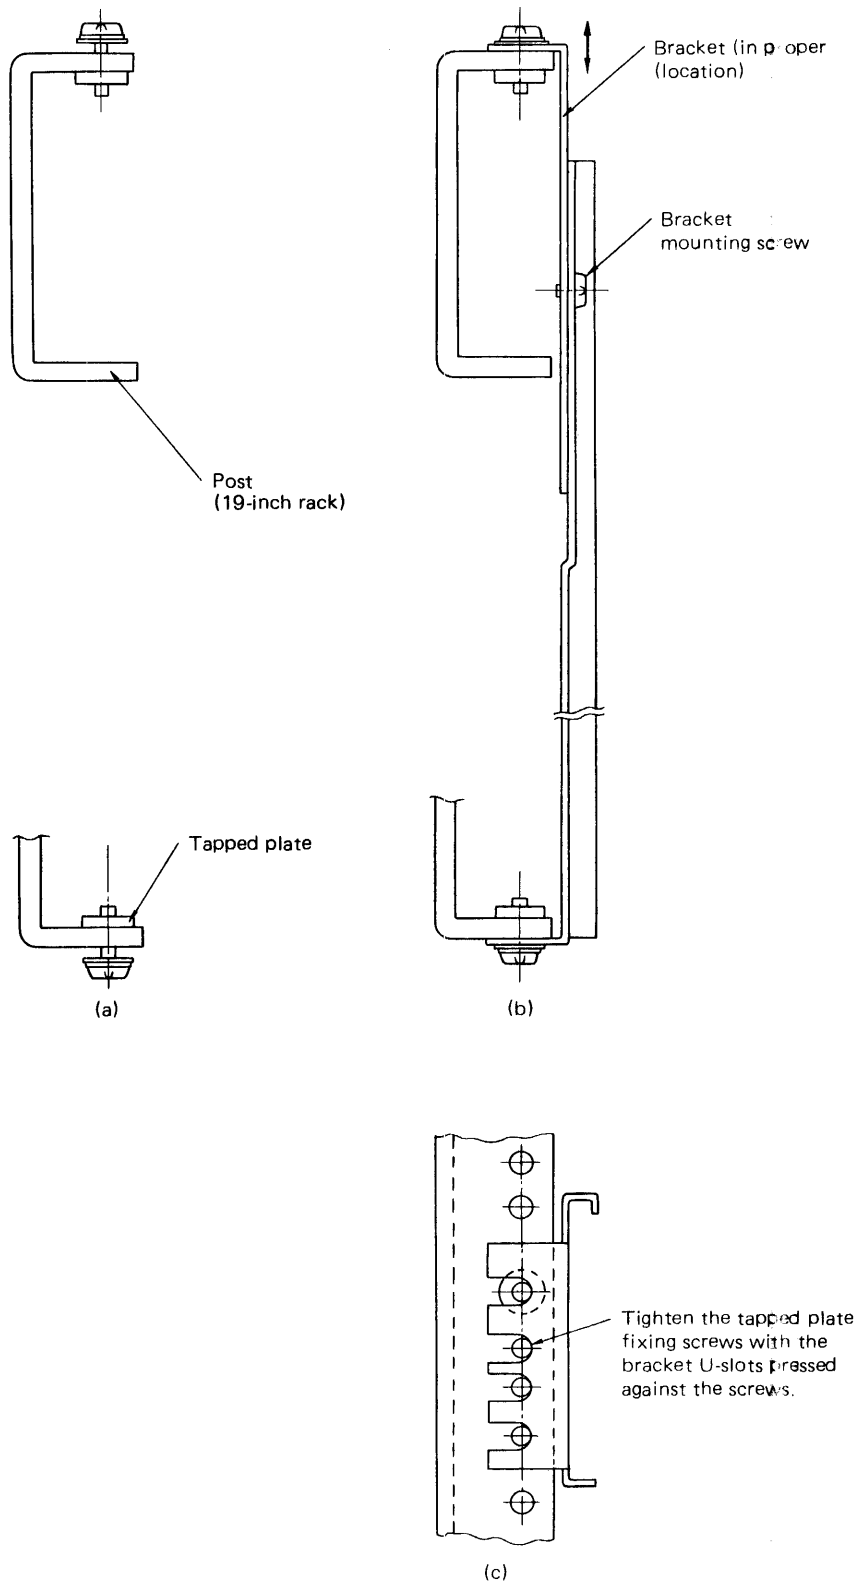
Bracket Assembly Mounting on the 19-inch Rack
